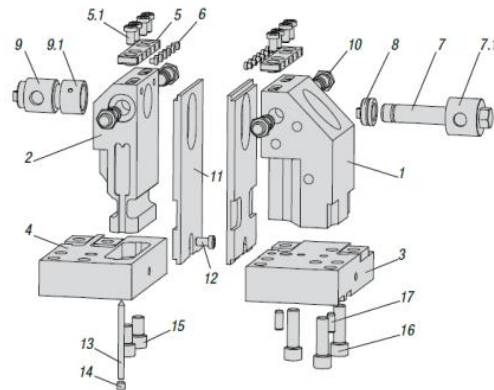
Device components: 1, 2 - jaws, 3, 4 - base plate, 5, 6 - clamping pins, 7, 7.1, 8 - spindle and tension element, 9 - spindle extensions with housing element 9.1, 10 - clamping screw, 11 - guidance support, 12, 13, 14, 15, 16, 17 - fastening elements
